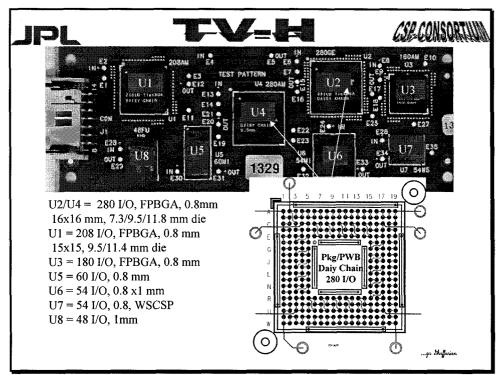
The assembled TV-H with numerous CSP and Fine pitch BGA packages. The package/PWB daisy chain for the 280 I/O FPBGA is shown on the bottom right.
